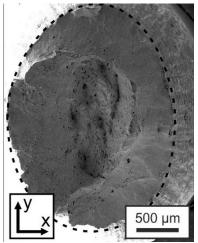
Ovalisation of fracture surface of Hastelloy X tensile test specimen [2]
